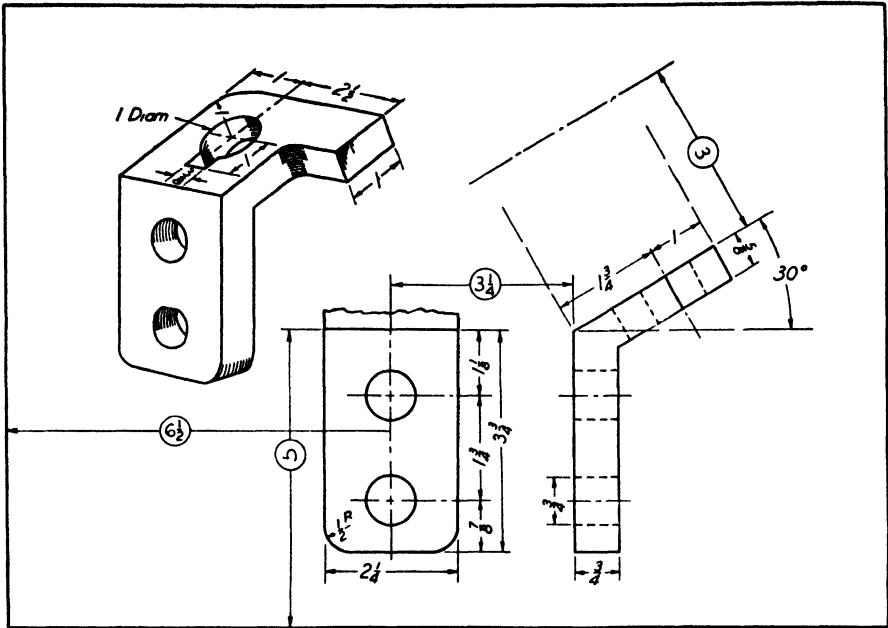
Prob. 165. Draw the two views as given and a part auxiliary view for the angle stop.
